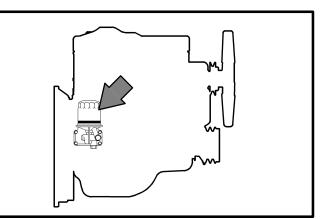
OIL FILTER ASSEMBLY, ISUZU 4JB1 ENGINES
